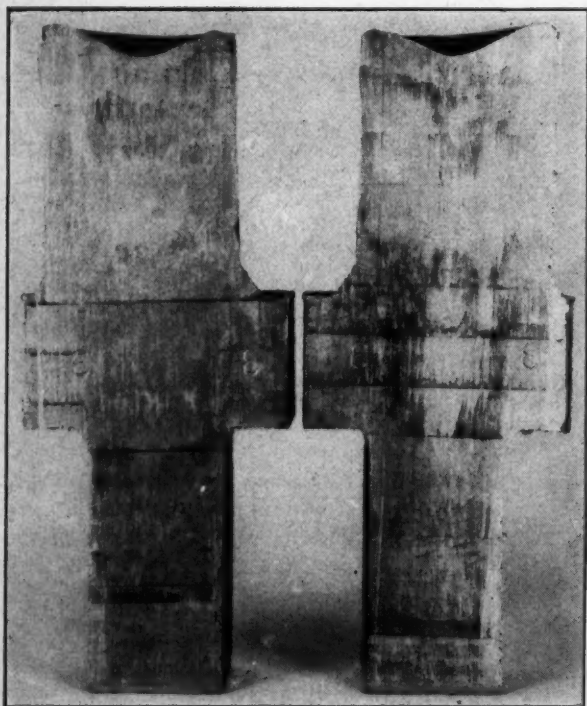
Nickel-copper alloy (monel metal) test casting;  $2\frac{1}{2}$  lb. exothermic material in riser. Note that both casting and riser are solid.
